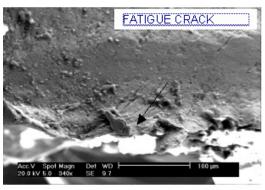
SHOWS THE TYPICAL FATIGUE CRACK ORIGIN AND SMOOTH PROPAGATION AND FINAL FAILURE
